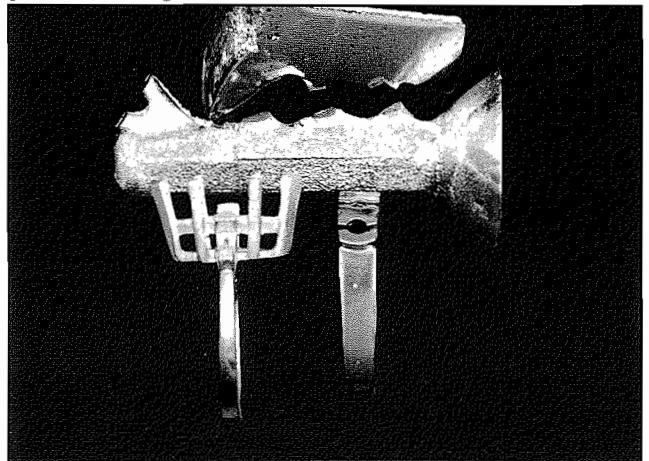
Assembled Pt-Ru alloy pieces after soldering and prior to cleaning
